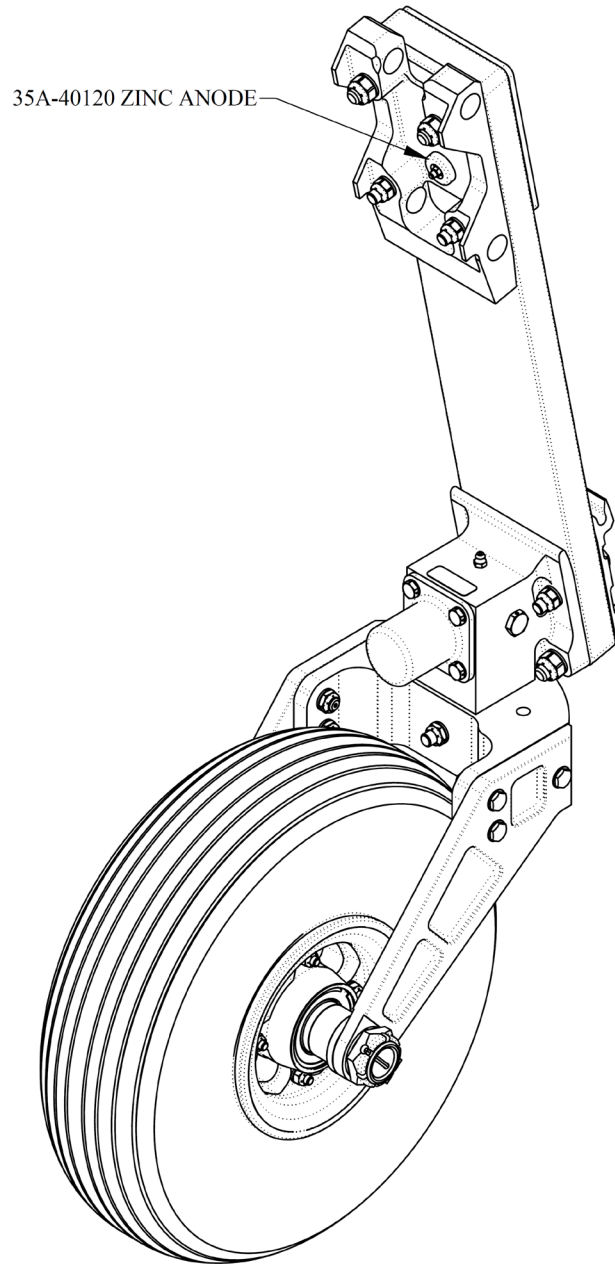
Zinc Anode Installation, Nose Gear, Slide Brackets
